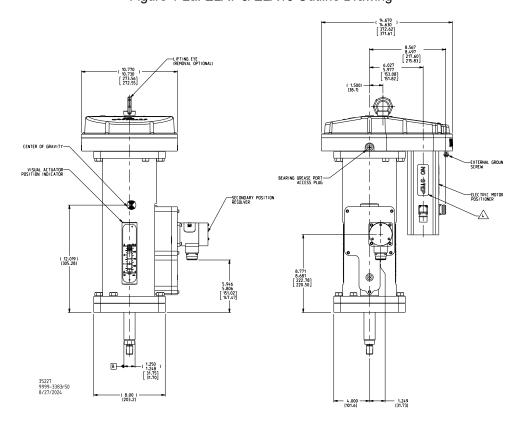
ELA7 & ELA13 Outline Drawing
